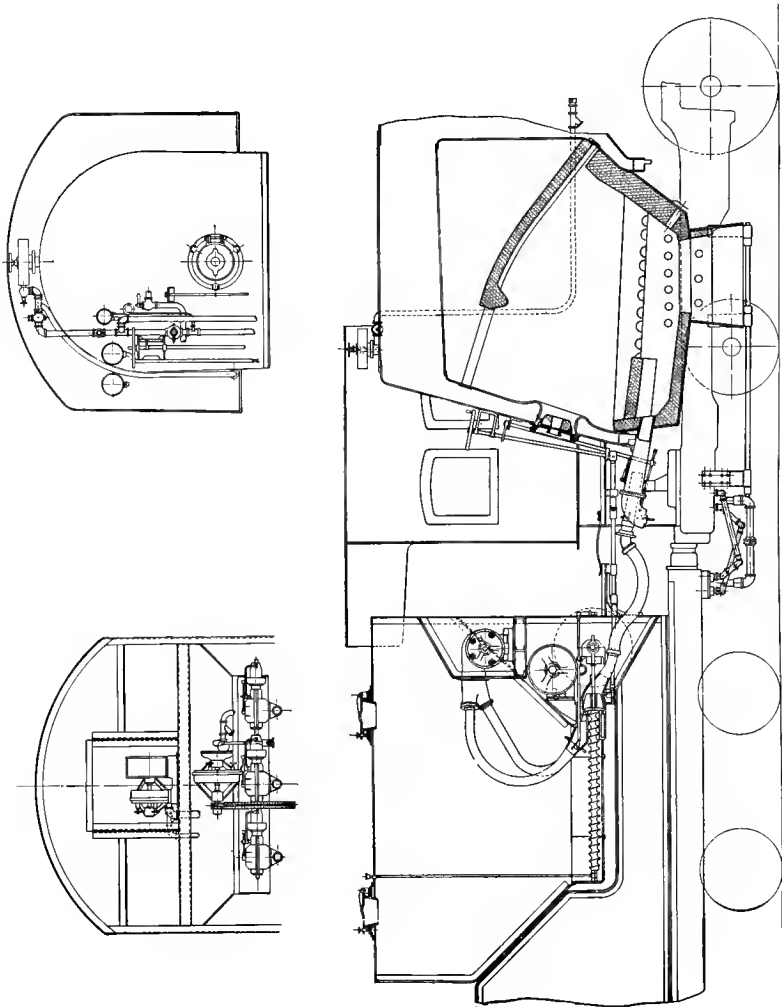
Powdered Coal Equipment in a Steam Locomotive.
